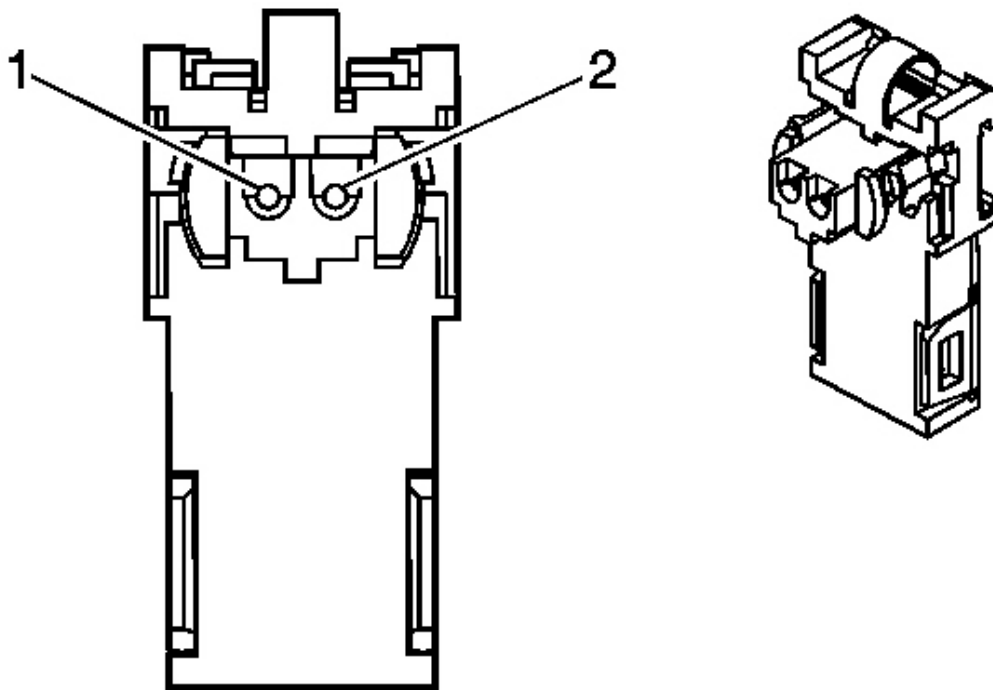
Seat Belt Pretensioner - Right Front Connector End View
